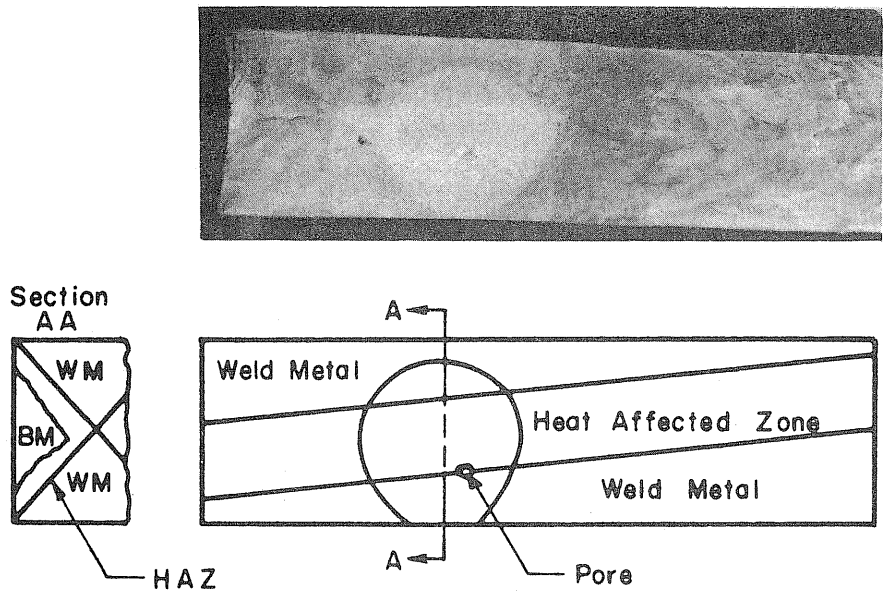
FRACTURE SURFACE OF SPECIMEN HY-43.
